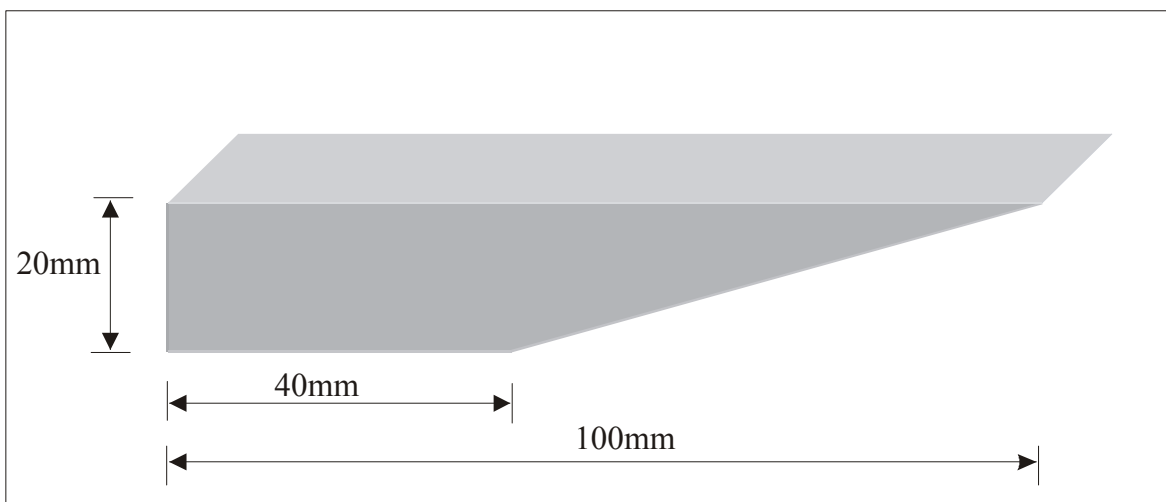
Tapered workpiece preparations for plain waterjet.
